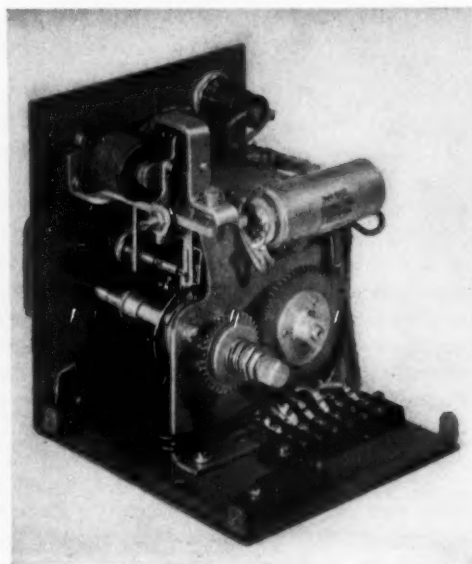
The synchronous drive motor drives the right-hand gear from behind the mounting bracket.
